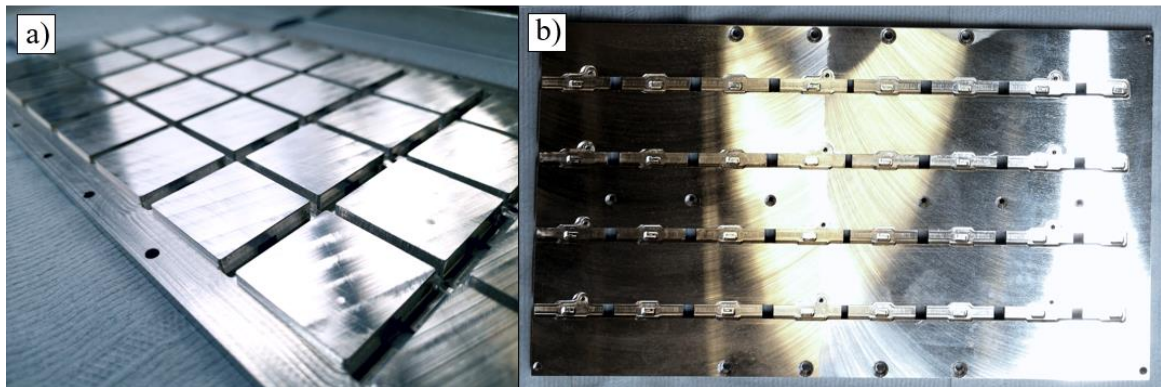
(a) The bottom side of the thermal transfer plate (TTP), which is in contact with the 32 Peltier elements via heat-conducting pads and (b) the top side with the cutouts for the temperature sensor PCB.
